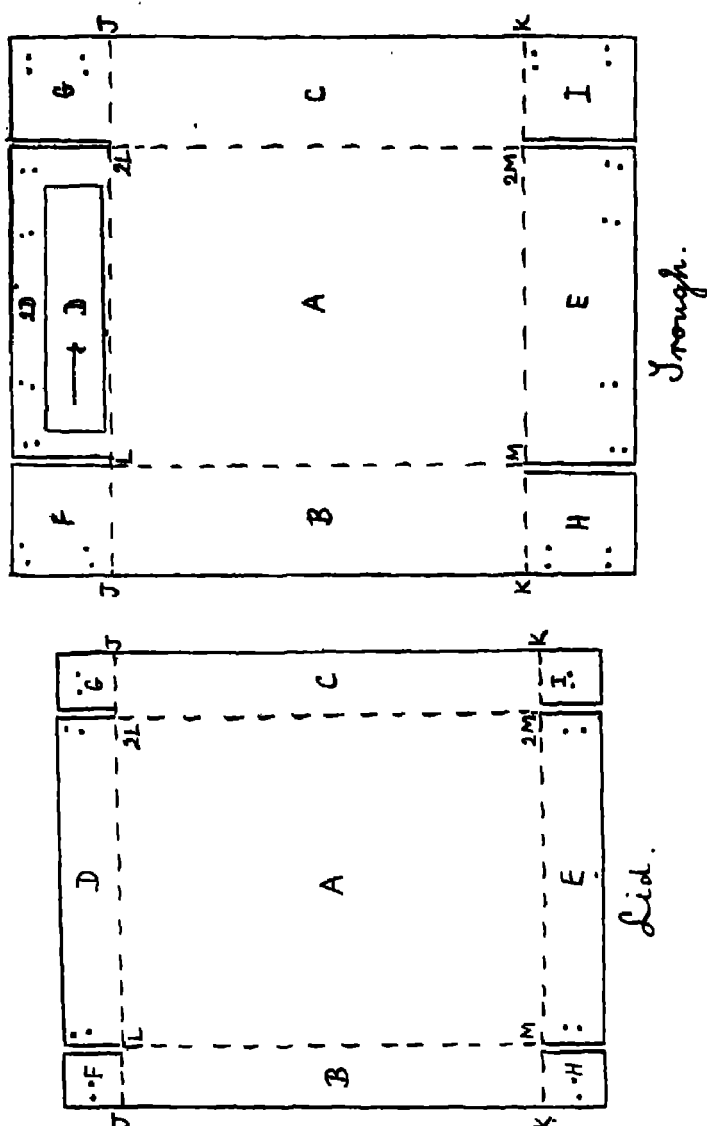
TWO-PIECE BOX TAKING TWELVE RUBBER BALLS.
